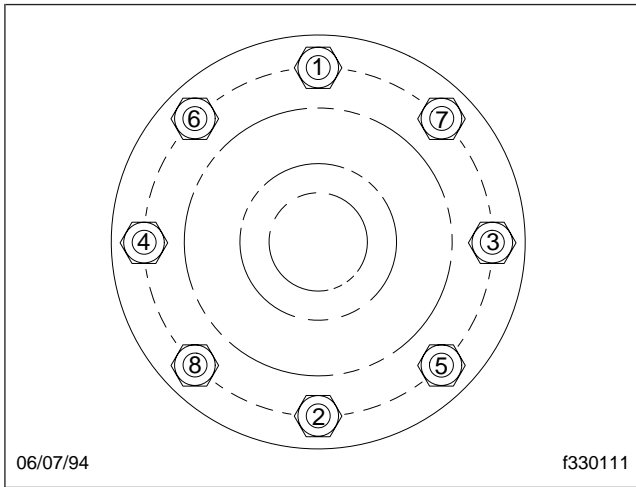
, Tightening Sequence, Drive Axle Stud Nuts
